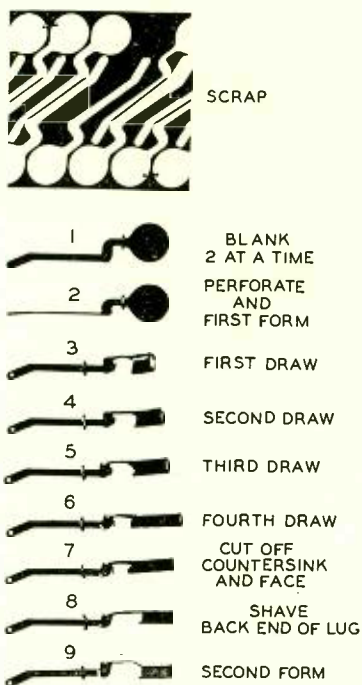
Sequence of machine operations in making the No. 92 jack sleeve from a sheet of nickel silver
